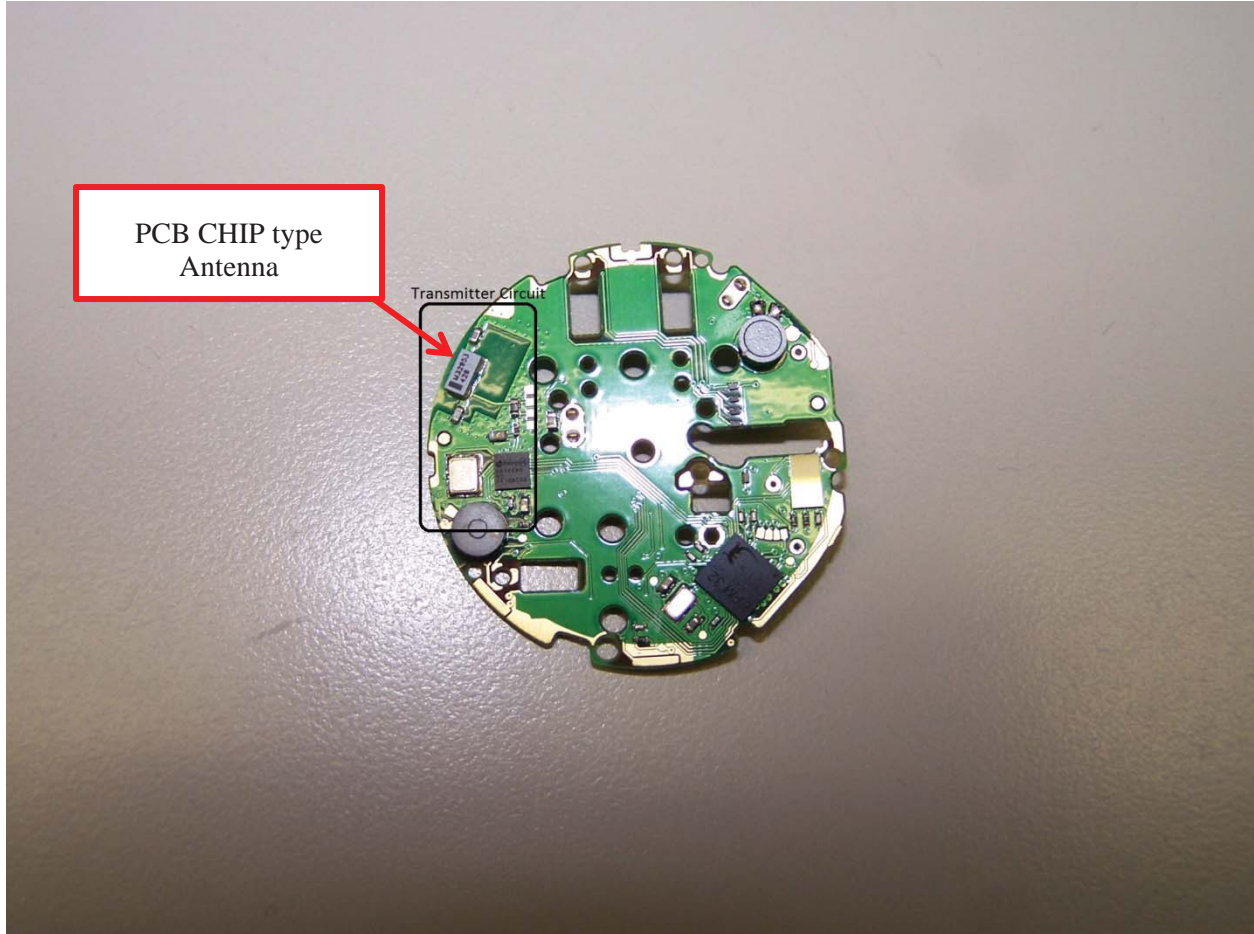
Dial Side View of PCB showing the BLE antenna with the Limited Modular transmitter section shown on a typical watch circuit board.
